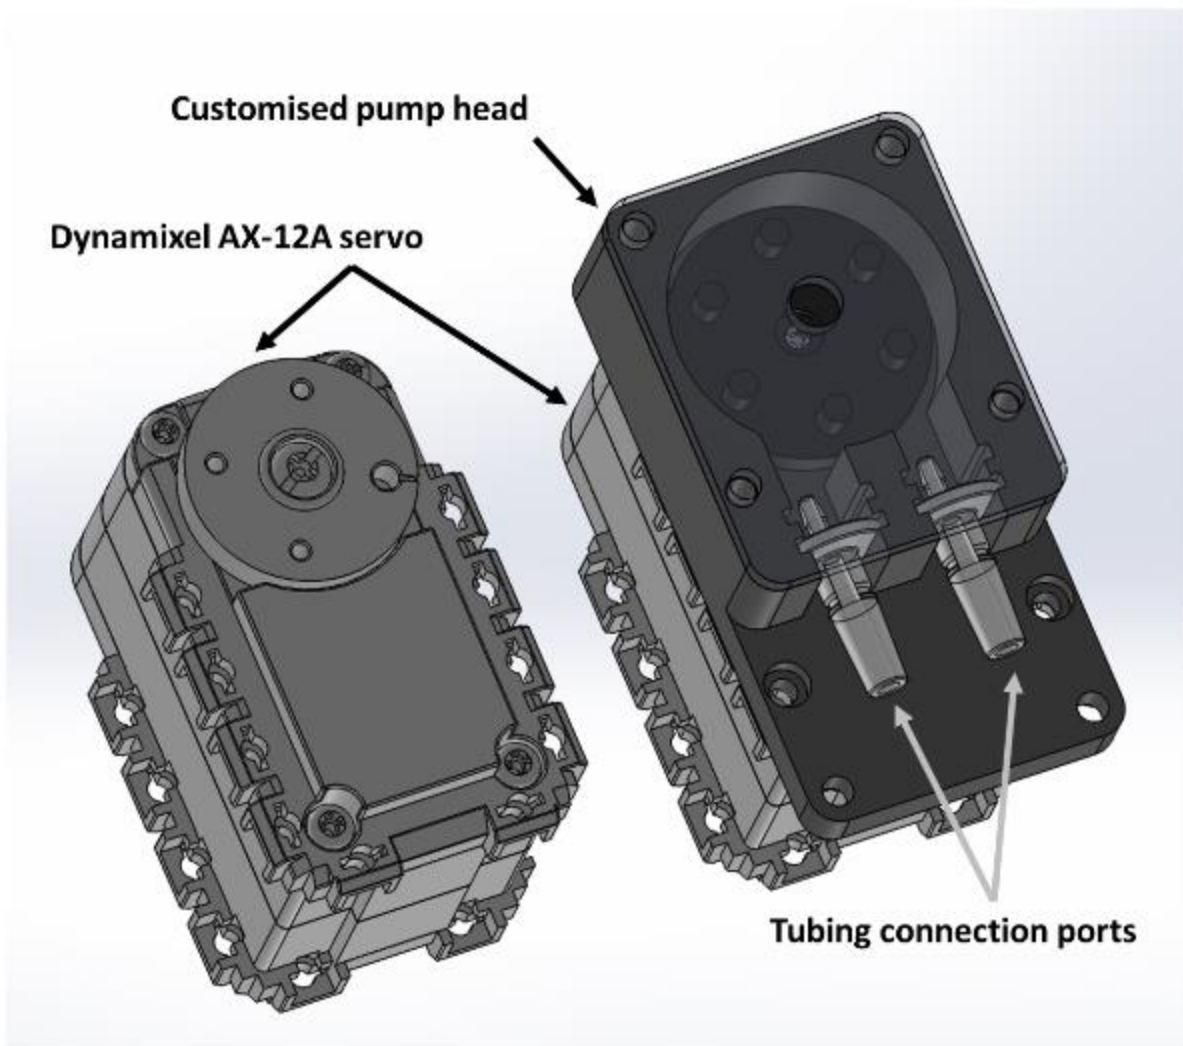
Computer aided design (CAD) of the miniaturised peristaltic pump based on a Dynamixel AX-12A servo motor. The customised pump head and the roller holder were 3D printed.
